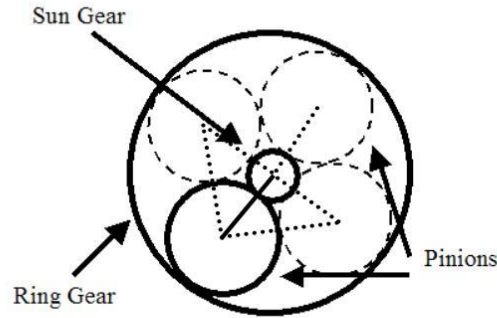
PLANETARY GEAR ARRANGEMENT
